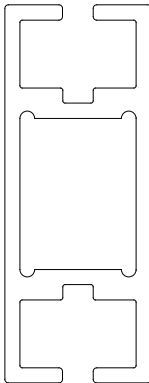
Section drawing of the extruded aluminium cross rail, 1:1
